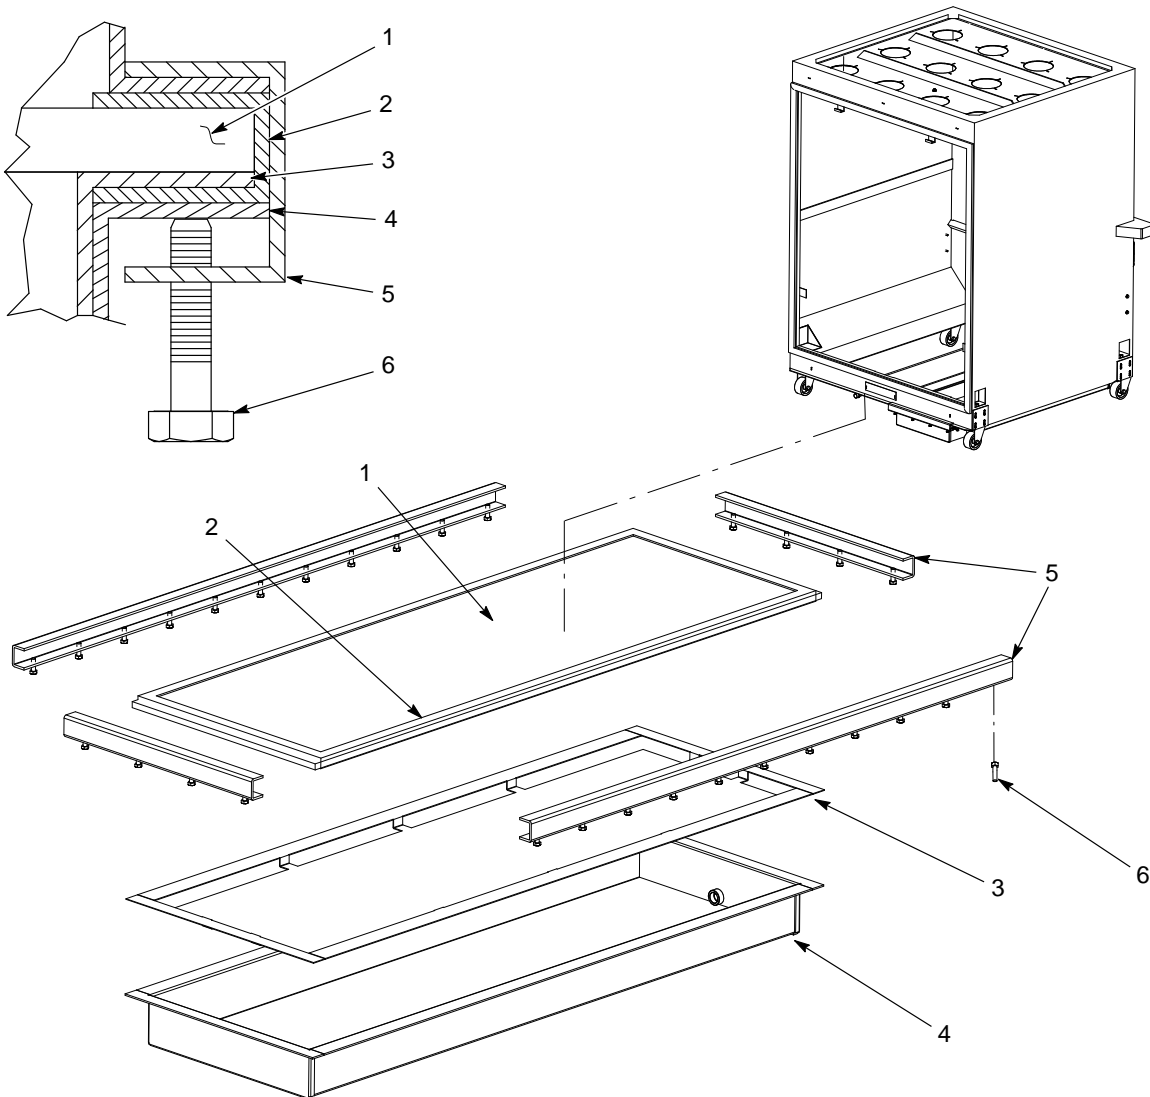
Typical Color Module Fluidizing Plate Replacement
